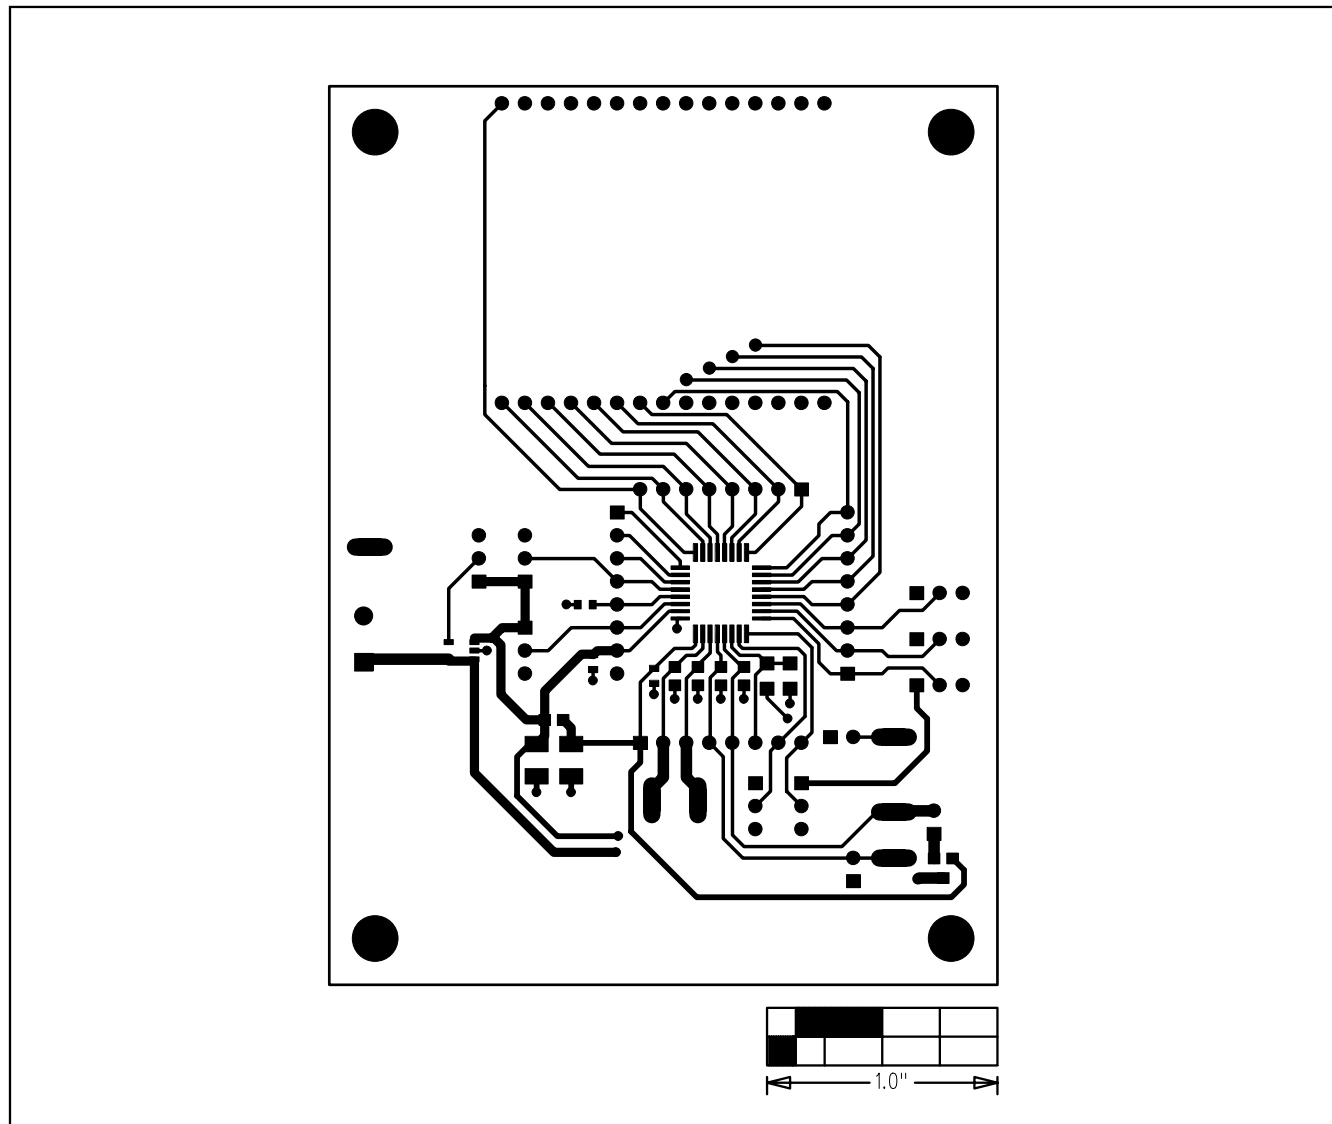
MAX1493 EV Kit PCB Layout—Component Side
